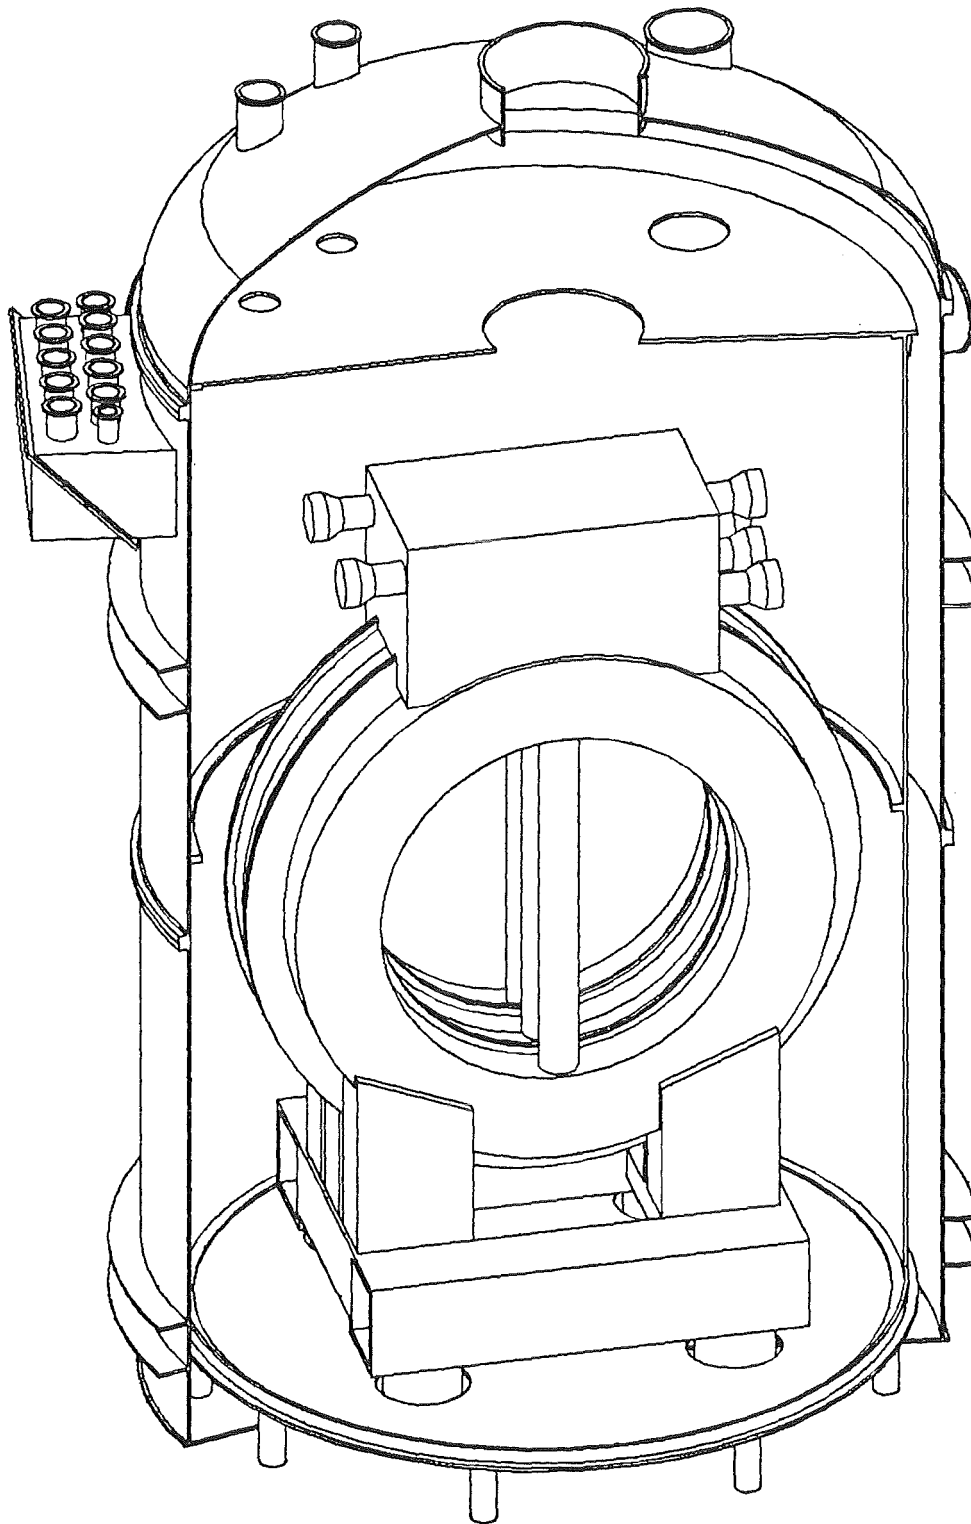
CAD generated View of the Solenoid Test Rig installed into the Vacuum Vessel .
